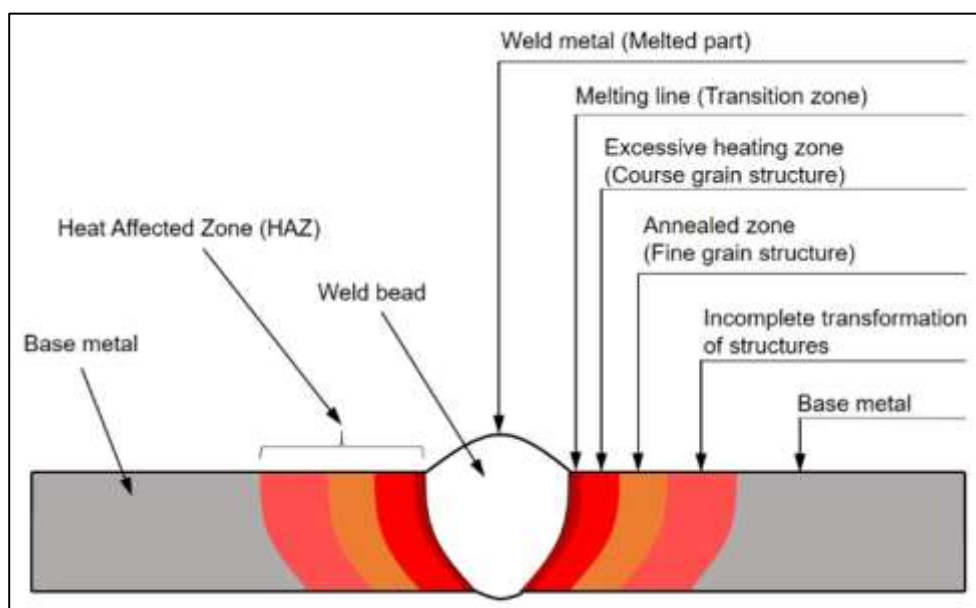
Schematic diagram of the welding zone (Husaini et al., 2019).
